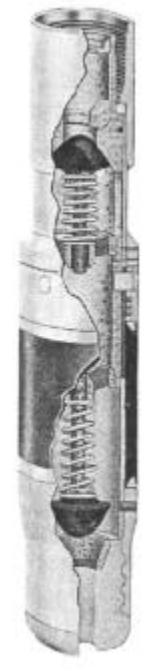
External packer with float shoe. An external packer equipped with a float shoe can be installed in the casing string to facilitate placing cement grout (Halliburton Services).
